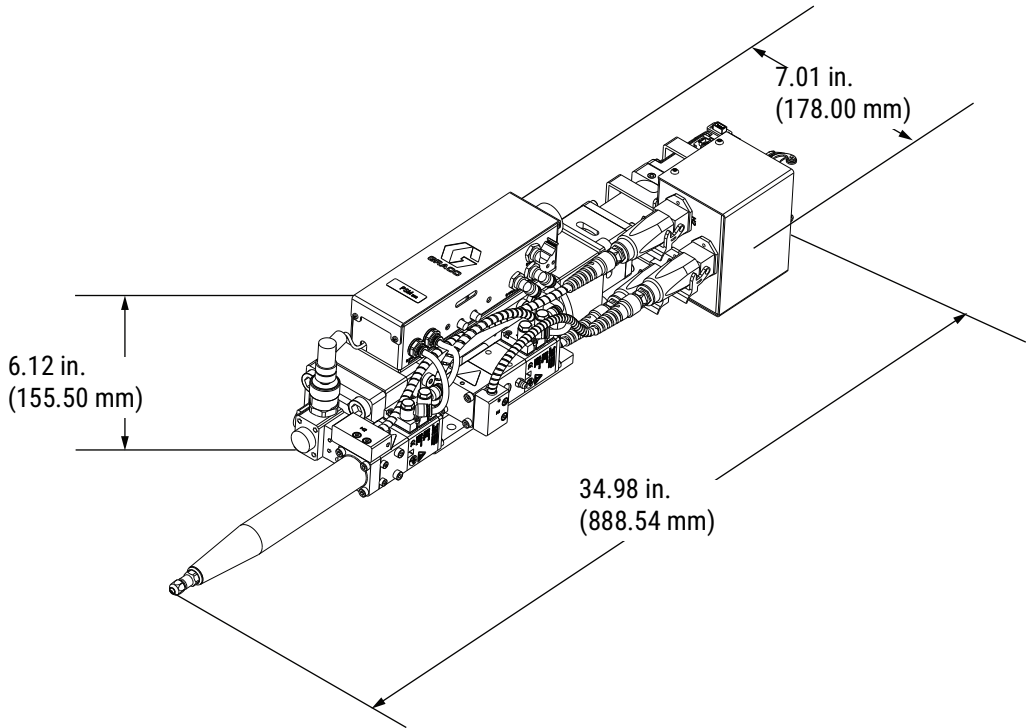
PSM Warm Melt Metering Unit Dimensions, 25cc
